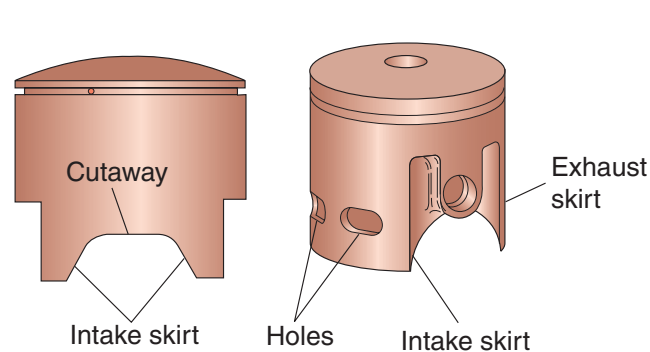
Two types of reed valve pistons. The piston on the left uses a cutaway on the intake side of the piston skirt. The piston on the right has holes on the intake side of the piston skirt.
